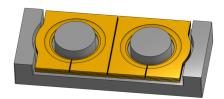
Final design of the four-pole inductor; top-piece not shown.
